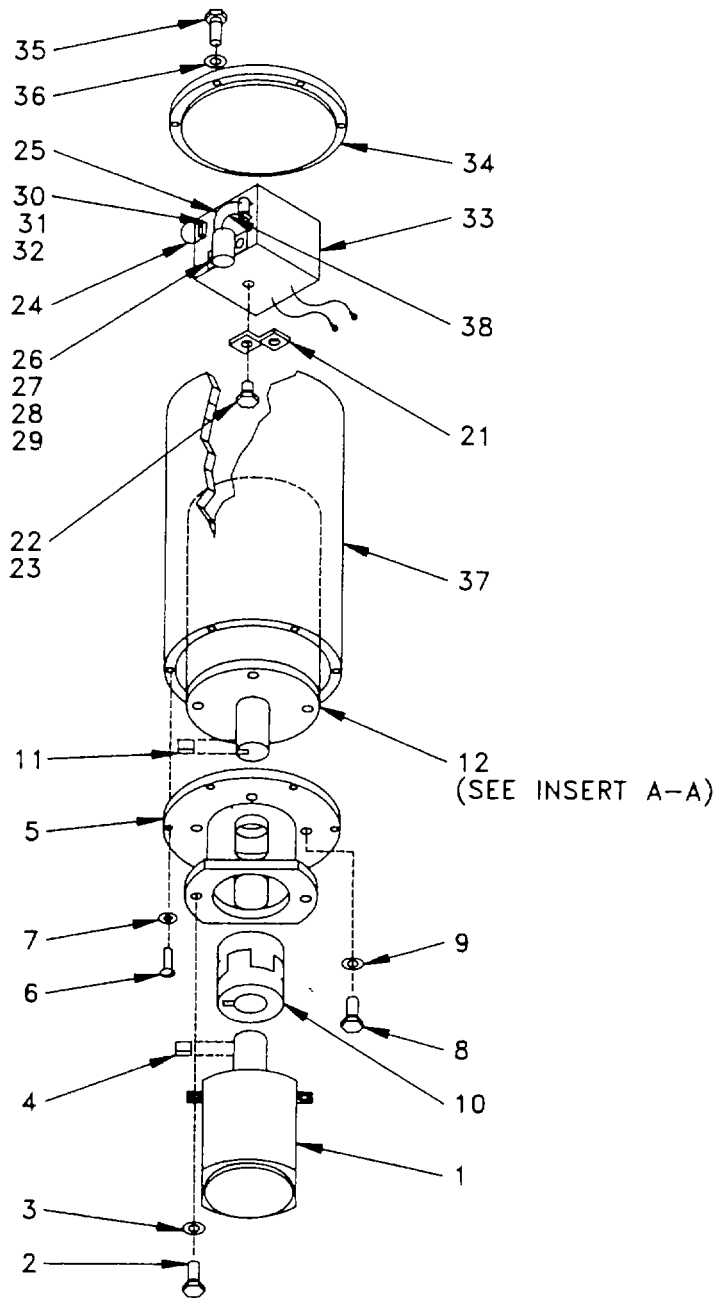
Motor And Pump Assembly (Page 1 Of 2)
